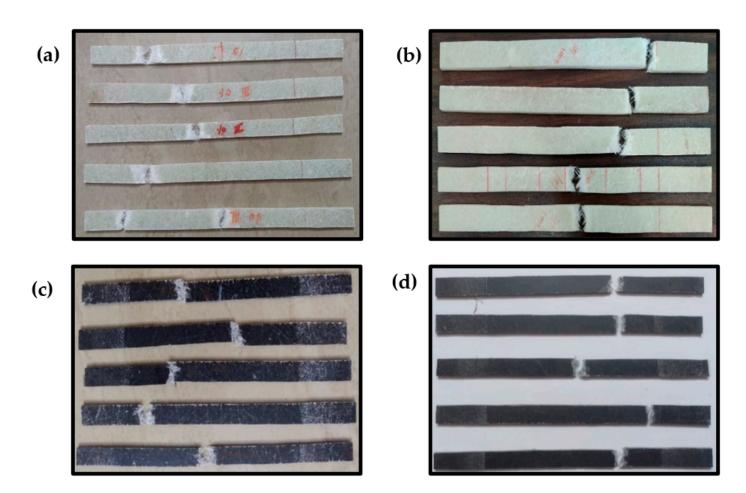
(a) Unfilled specimens; (b) uncarbonised eggshell filled specimens; (c) carbonised eggshell filled specimens; (d) hybrid specimens.
